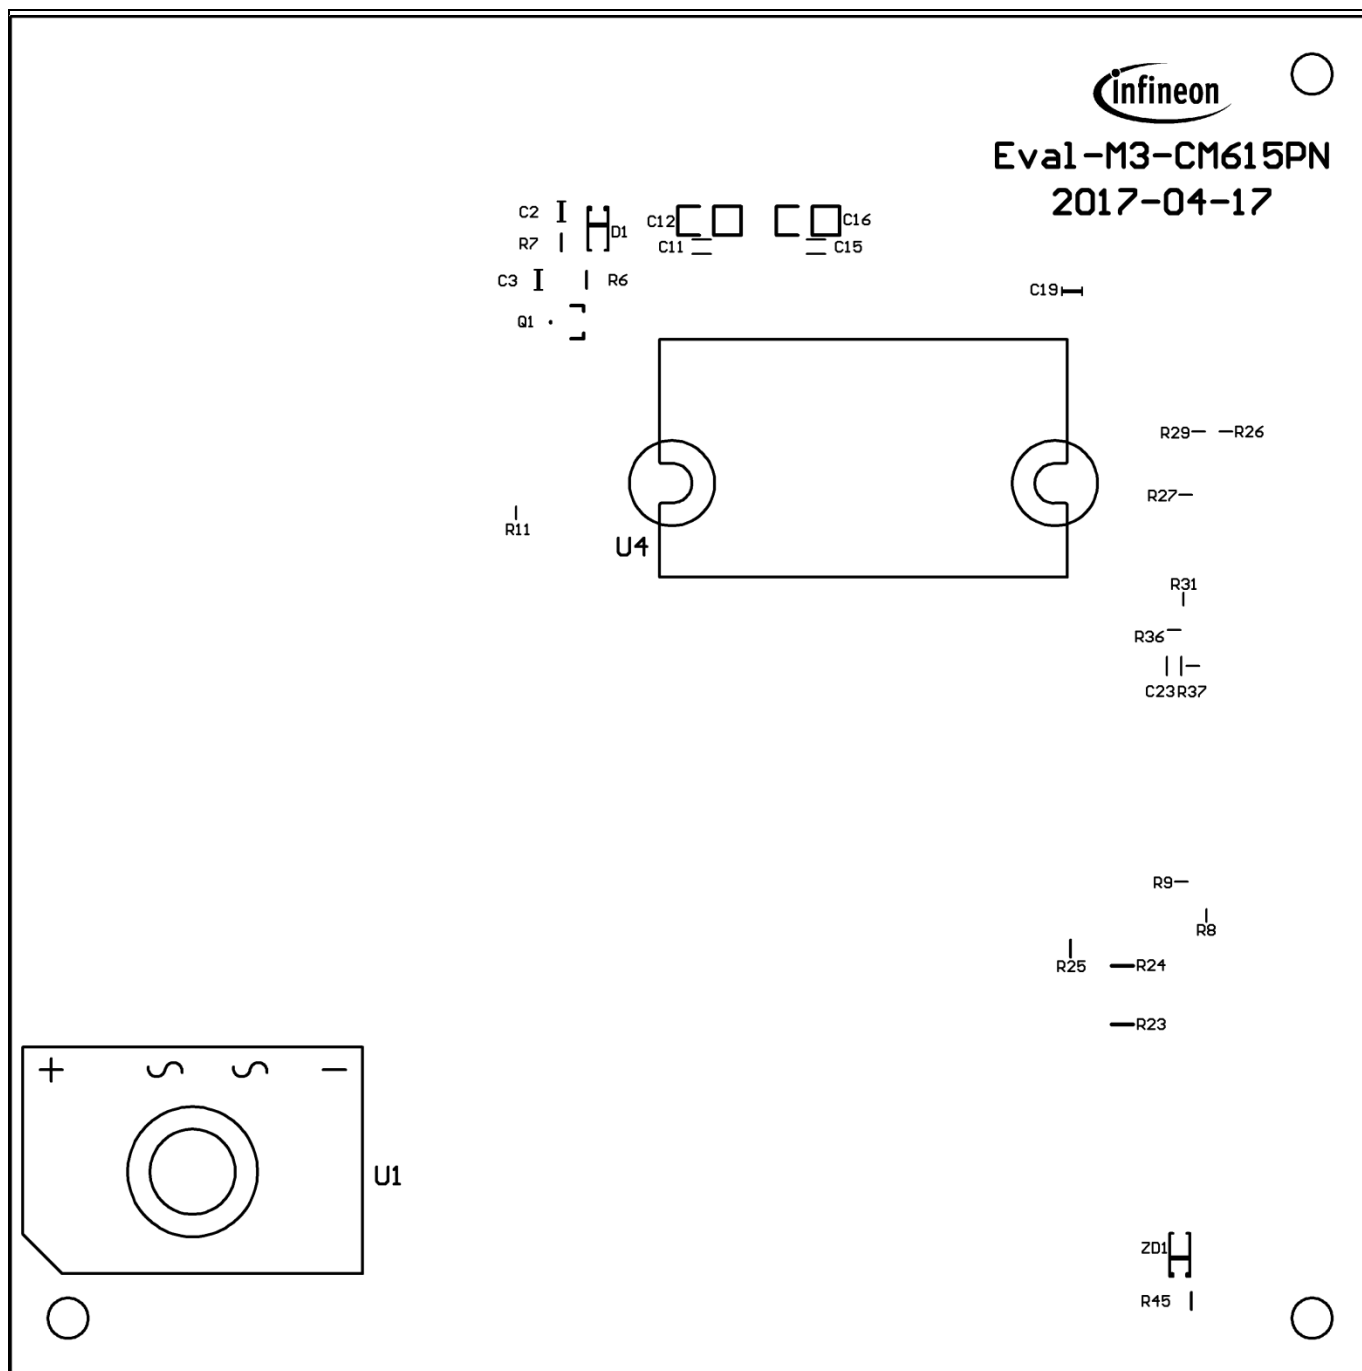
Bottom assembly print of the Eval-M3-CM615PN evaluation board
